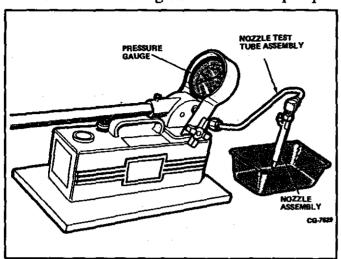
Typical Nozzle Assembly Mounted in the Hand Test Pump
